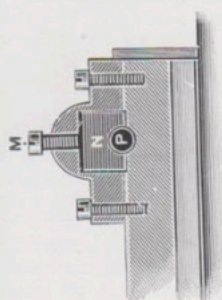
Sectional View of adjustable fittings of rack and pinion.
